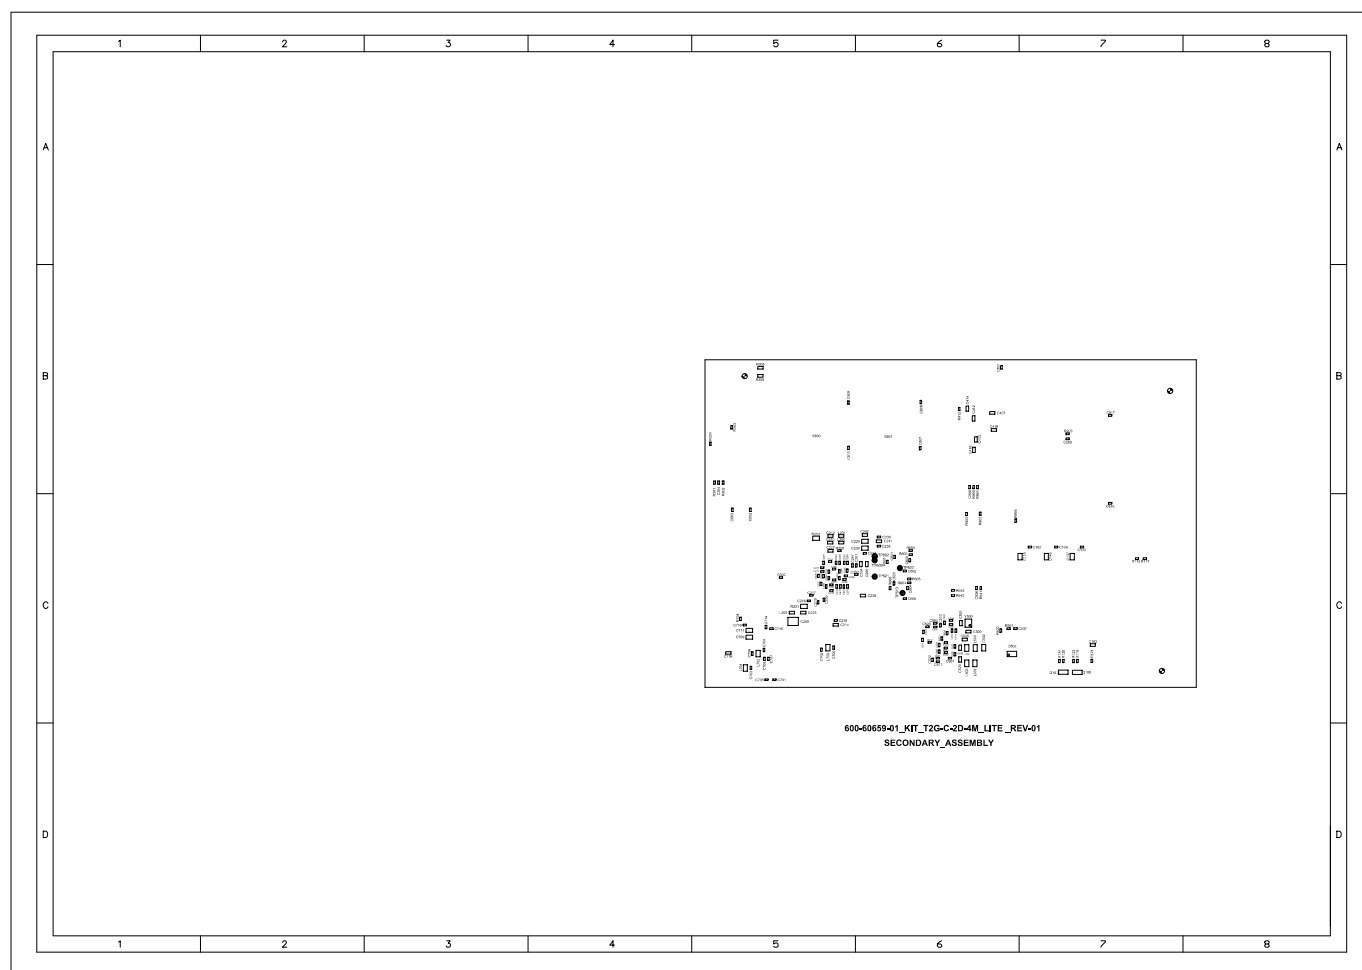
Secondary side assembly of TRAVEO™ T2G Cluster 4M Lite Kit Rev-01
